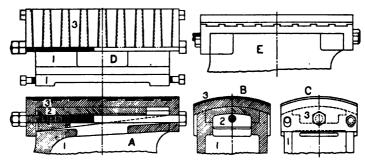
Corliss-engine Cross-head with separate wedges.
